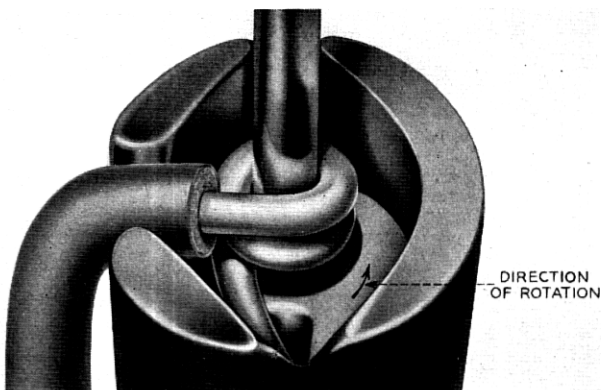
Muzzle of wiring tool showing terminal and connecting wire in position ready for wrapping.
